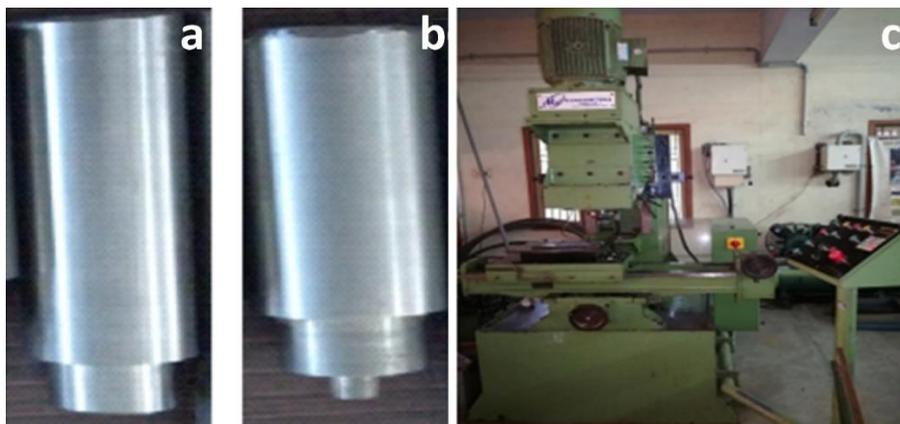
Photographs of the experimental friction stir processing (FSP) set-up: FSP tool (a) without the pin for specimen preparation, (b) with a cylindrical pin profile for processing, and (c) FSP machine
